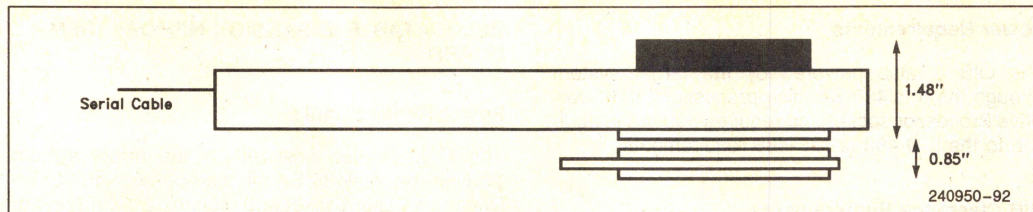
ICD-486 Probe Dimensions with ADAPT Pin Scrambler Board Installed
